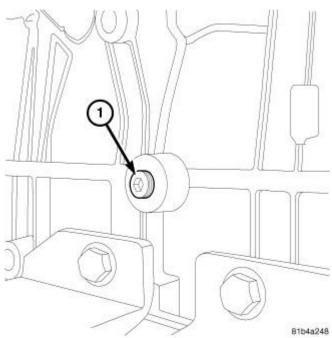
Crankshaft Locking Tool Courtesy of CHRYSLER LLC
